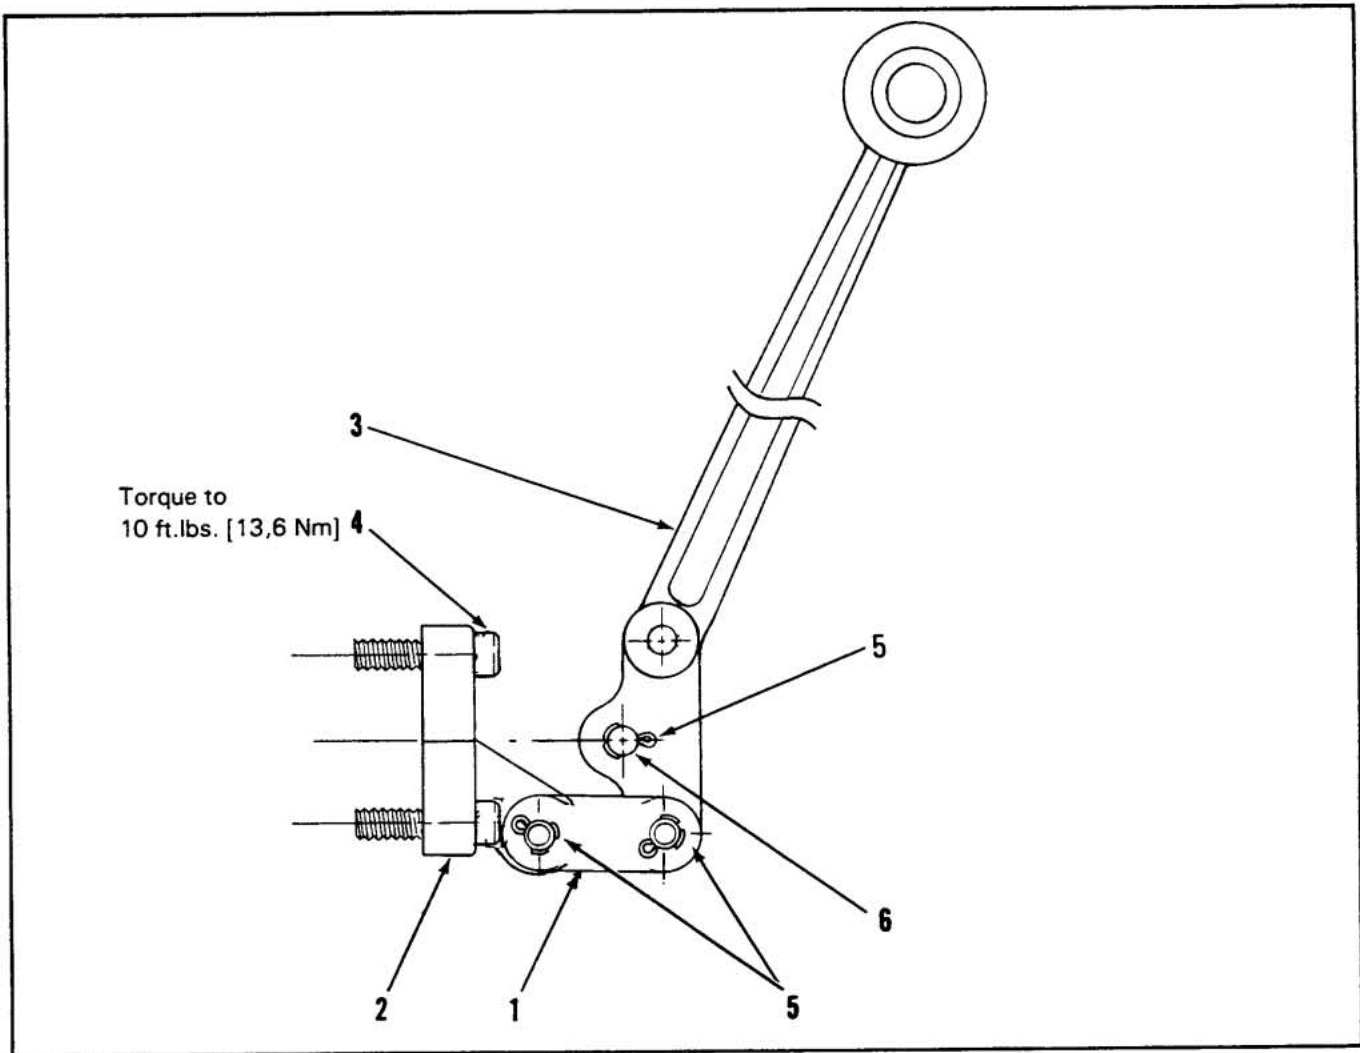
Optional Vertical Handle and Bracket Assembly.
